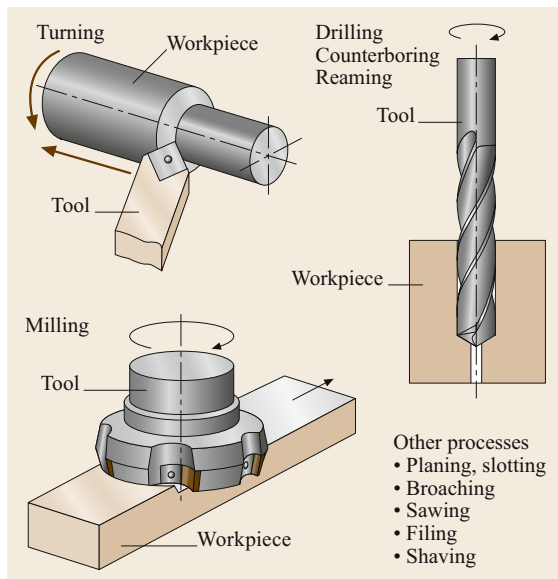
Cutting processes (machining with geometrically well-defined tool edges) [12.1]
